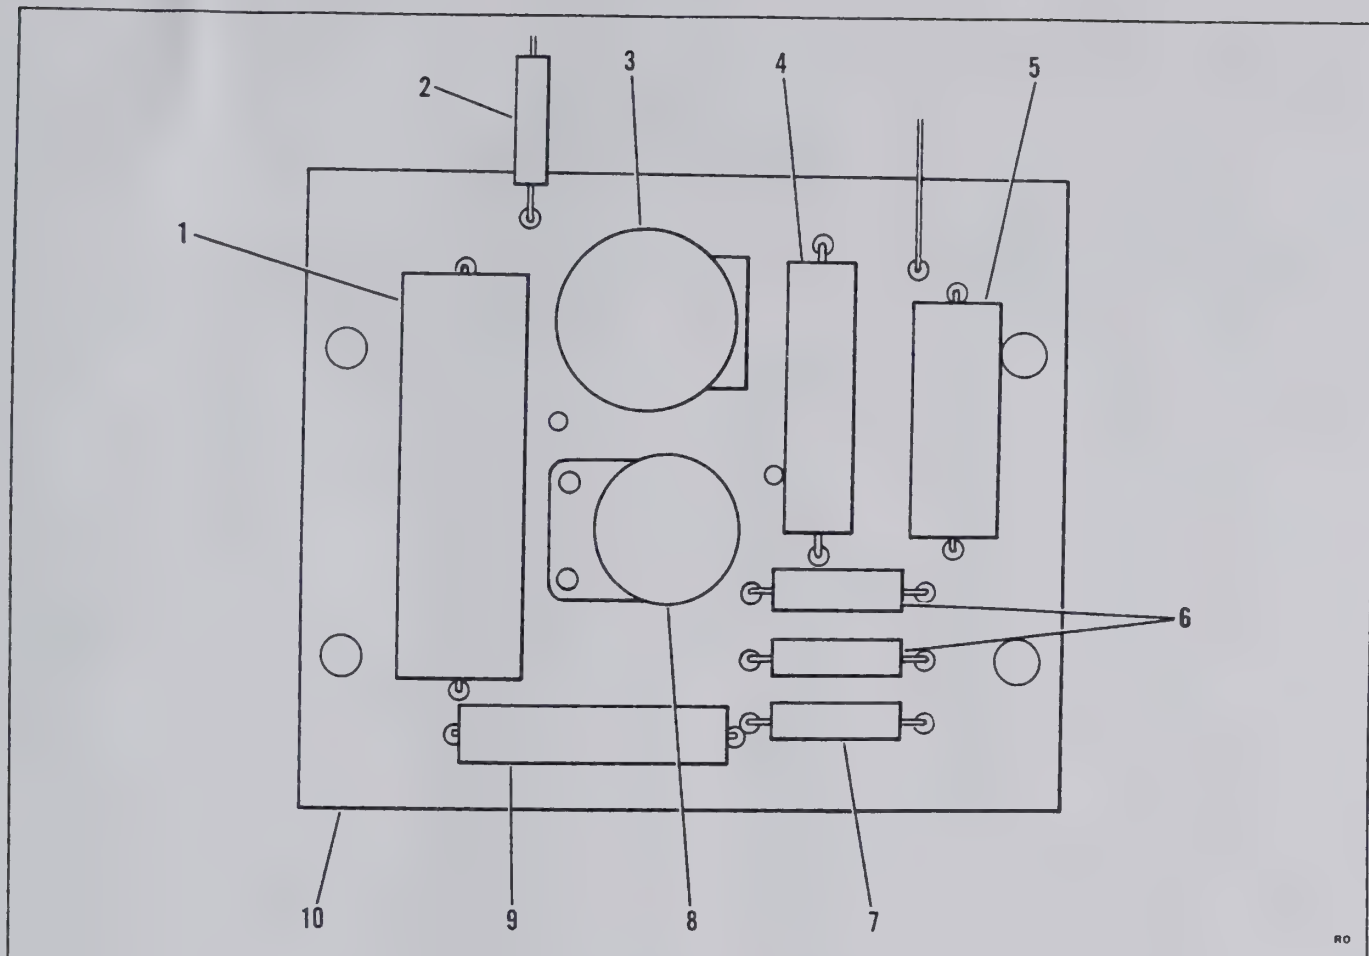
Printed Circuit Board Assembly, Part No. 400D-65C
